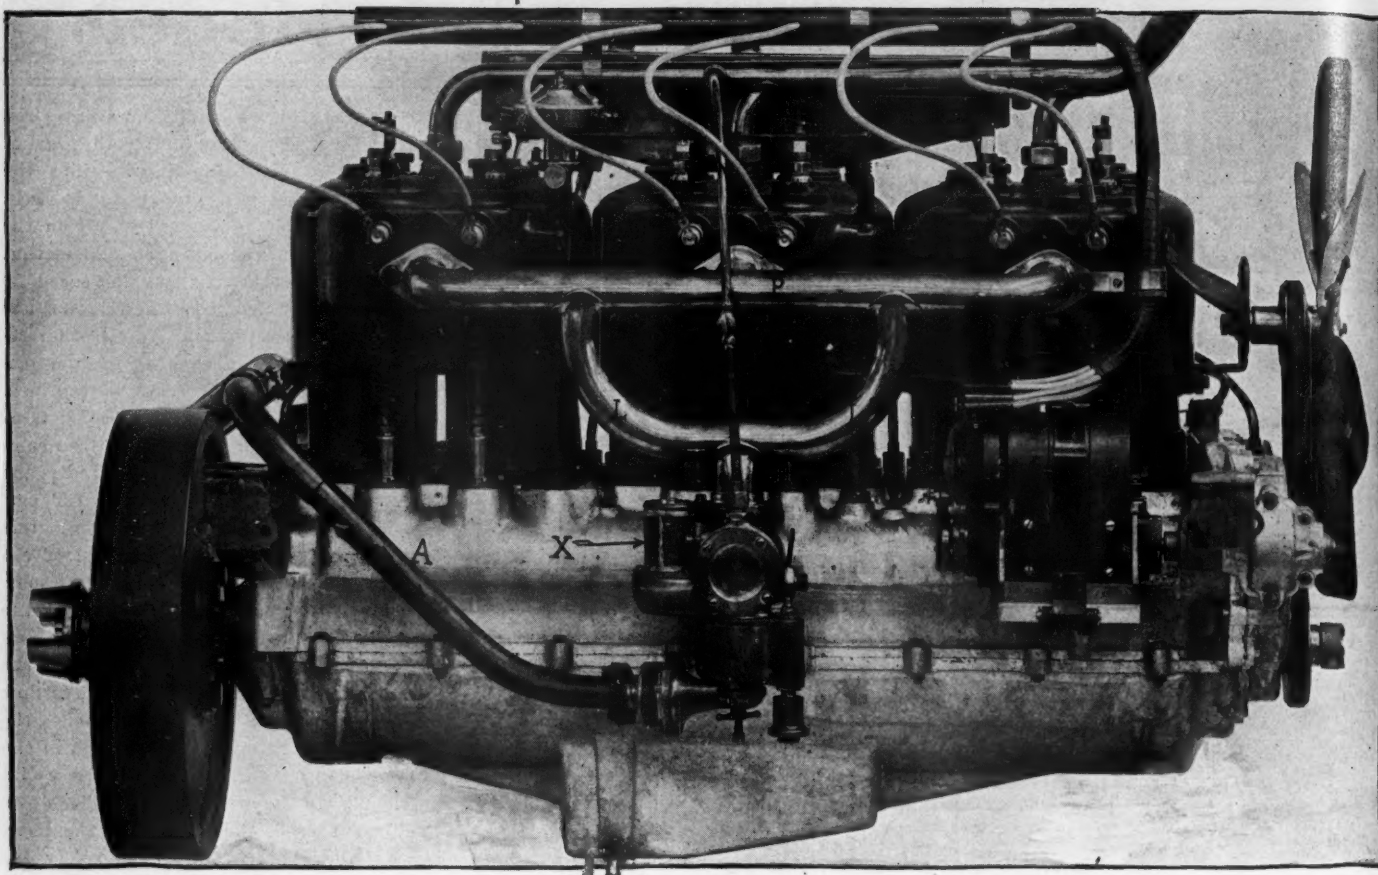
X AUXILIARY AIR VALVE ON PIERCE MOTORS AND INTAKE MANIFOLD
